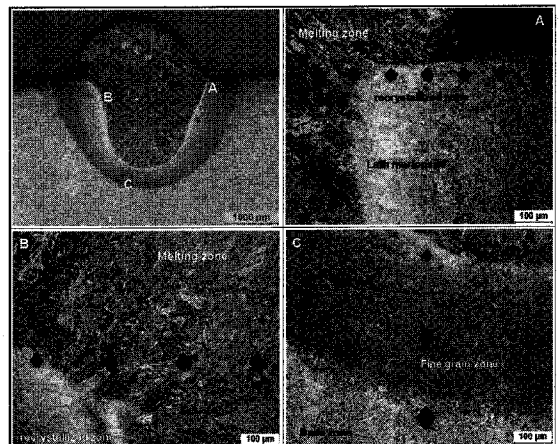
Micro structure of rearing zone after repair welding
